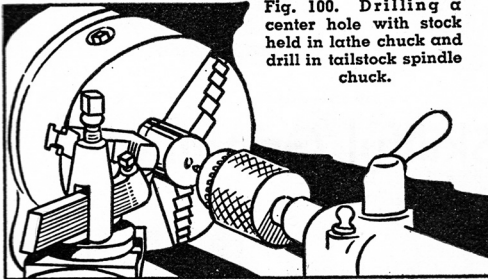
Drilling a center hole with stock held in lathe chuck and drill in tailstock spindle chuck.
